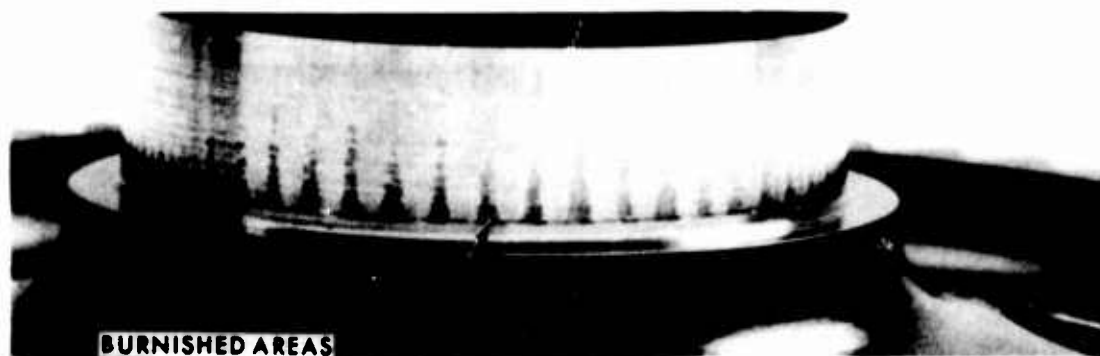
Burnished Roller - First-Row Pinion Dummy Gearbox.
